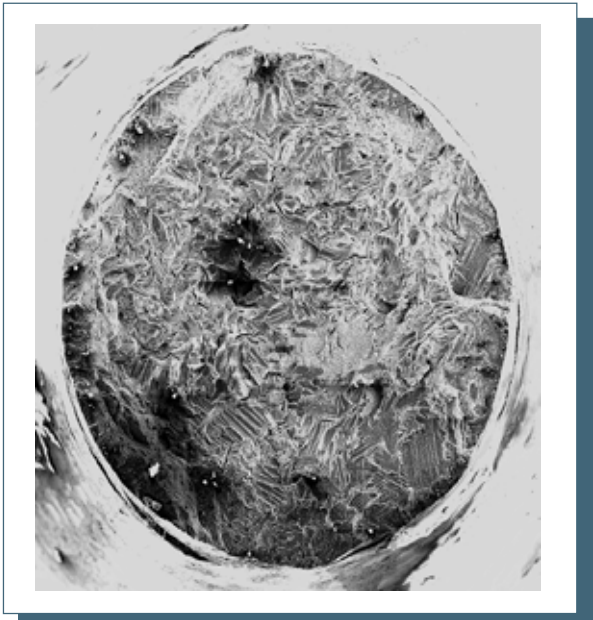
Fractography of an un-welded specimen broken by tensile test: overall view.
